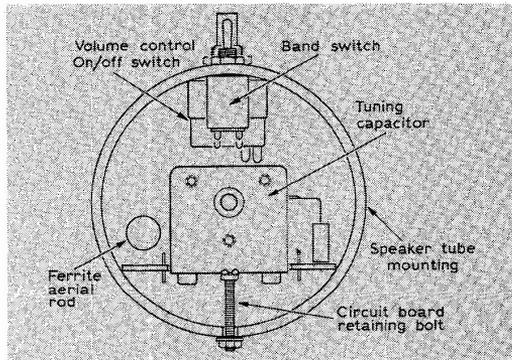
Disposition of the circuit board and major components inside the speaker tube.
